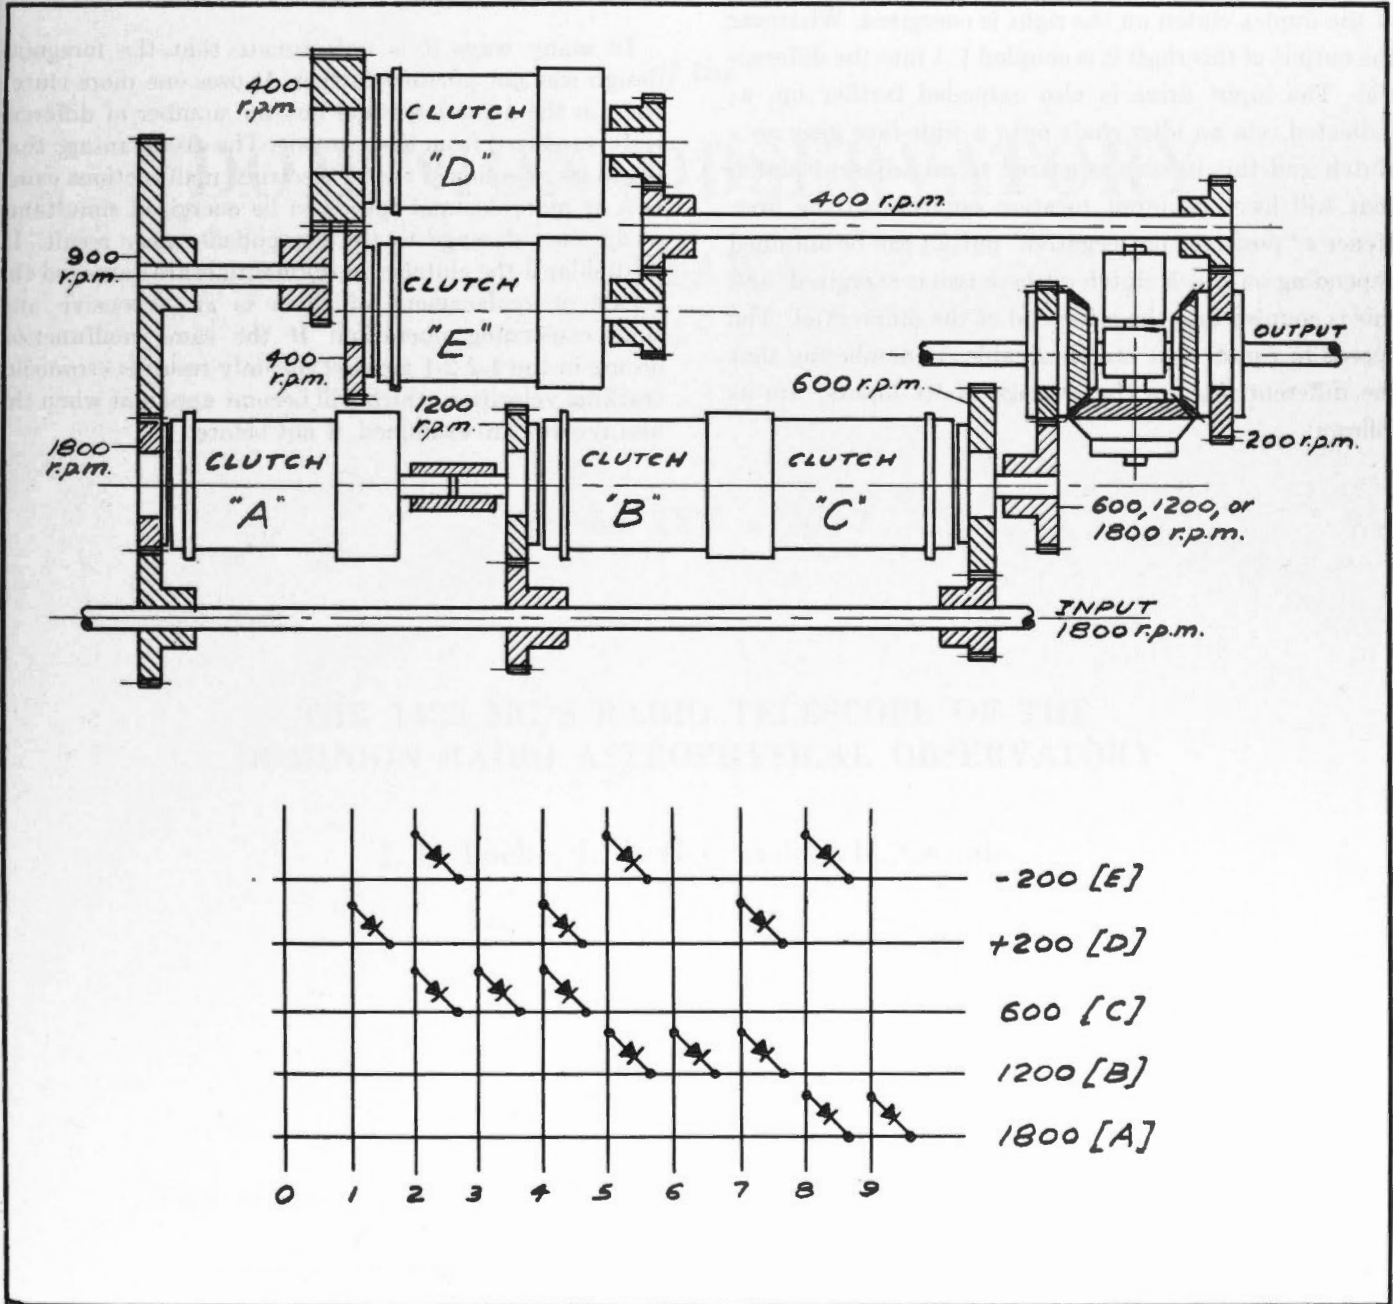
Assembly drawing for 10-speed gear box described in Appendix II, and diode matrix for conversion of decimal to 1-2-3 code. It is understood that clutch input gears are bolted to clutch input discs and output gears are set-screwed to output shafts. No support bearings for components or shafts are shown.
